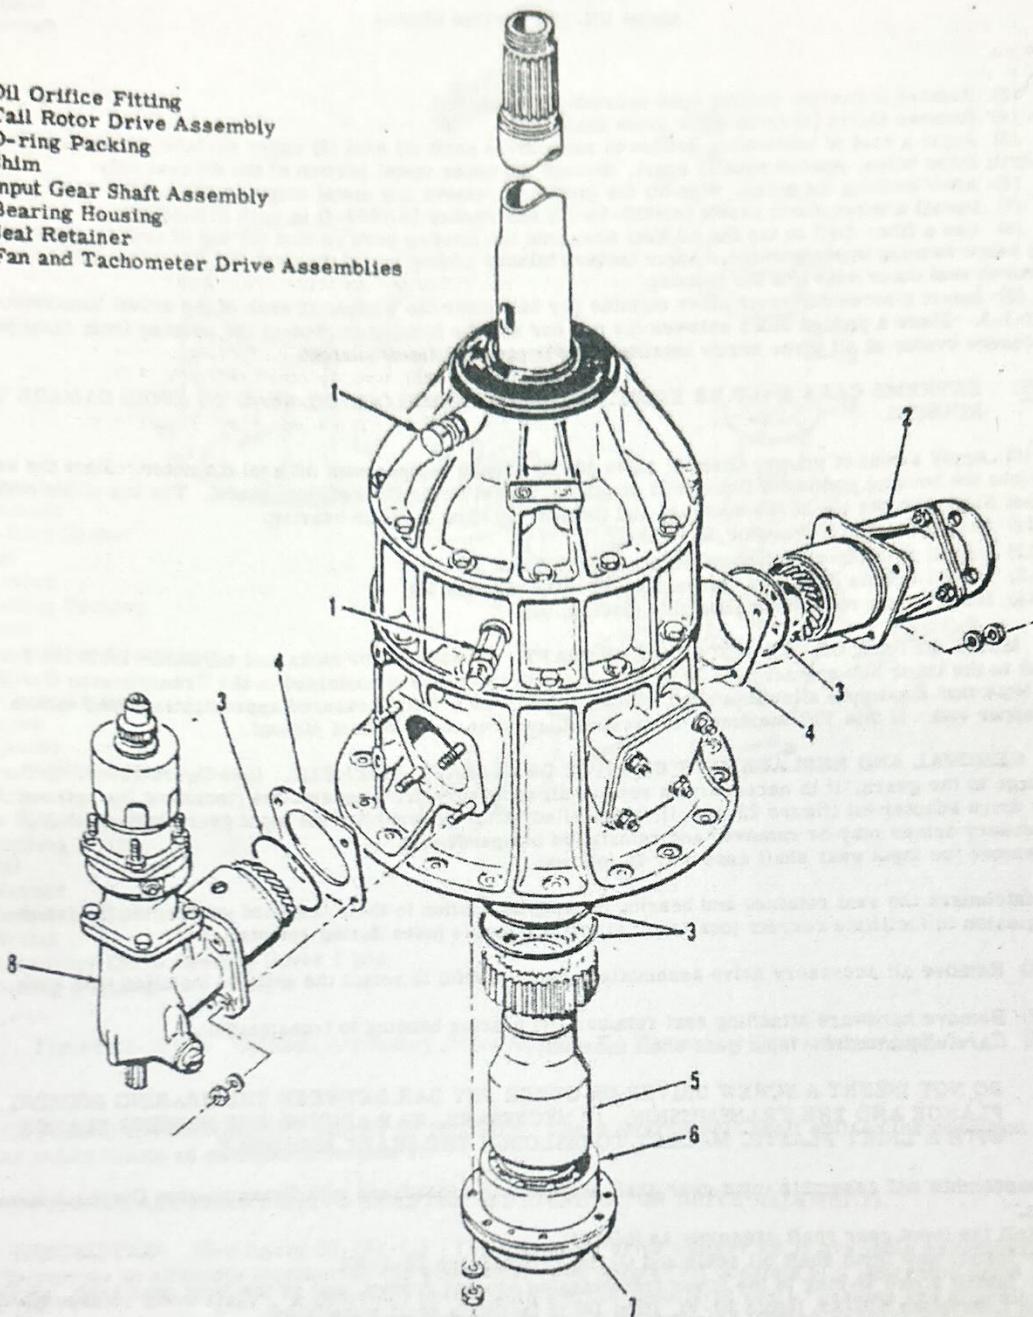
Input Gear Shaft and Accessory Drive Assemblies, Transmission Standard Configuration
